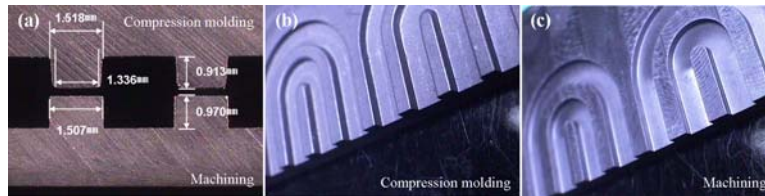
Bipolar plate fabricated by compression molding and by machining.
